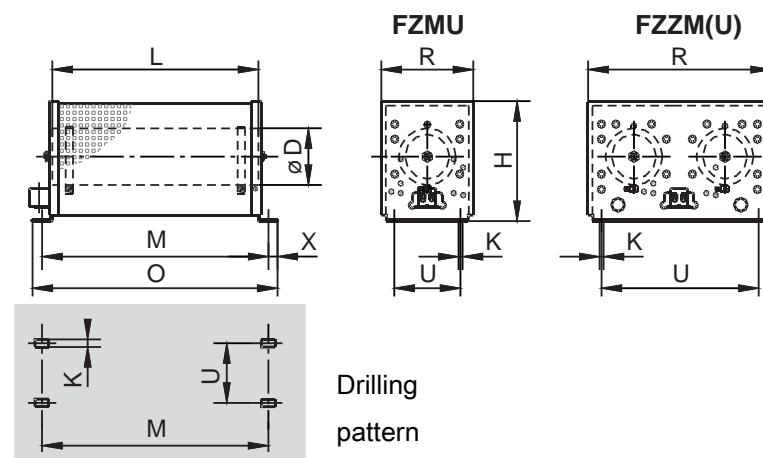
Dimensional drawing FZMU, FZZMU 400×65
